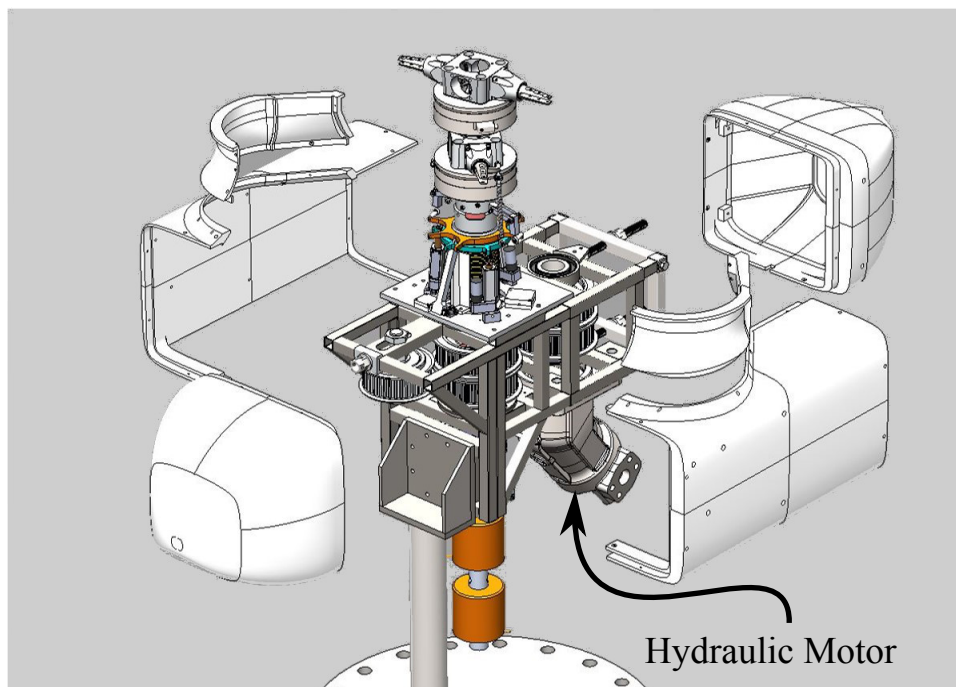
Belt driven coaxial transmission with hydraulic motor
